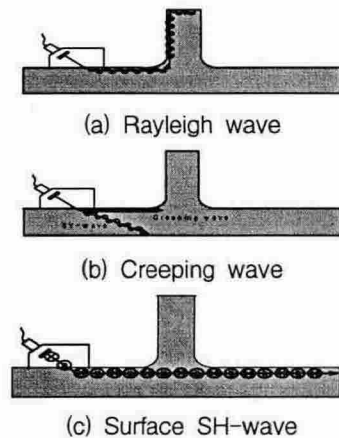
Propagation direction of each surface wave types at fillet weldments.
